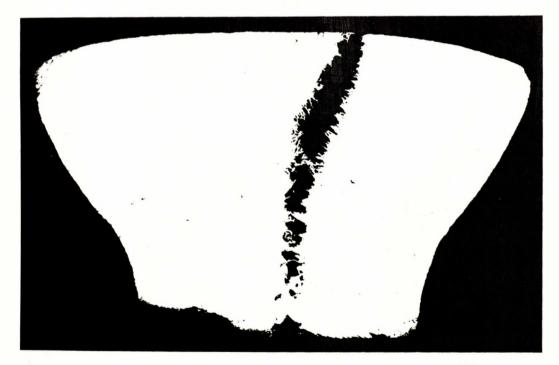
Section through middle of broken anchor bolt showing shrinkage pipe caused by improper feeding.
